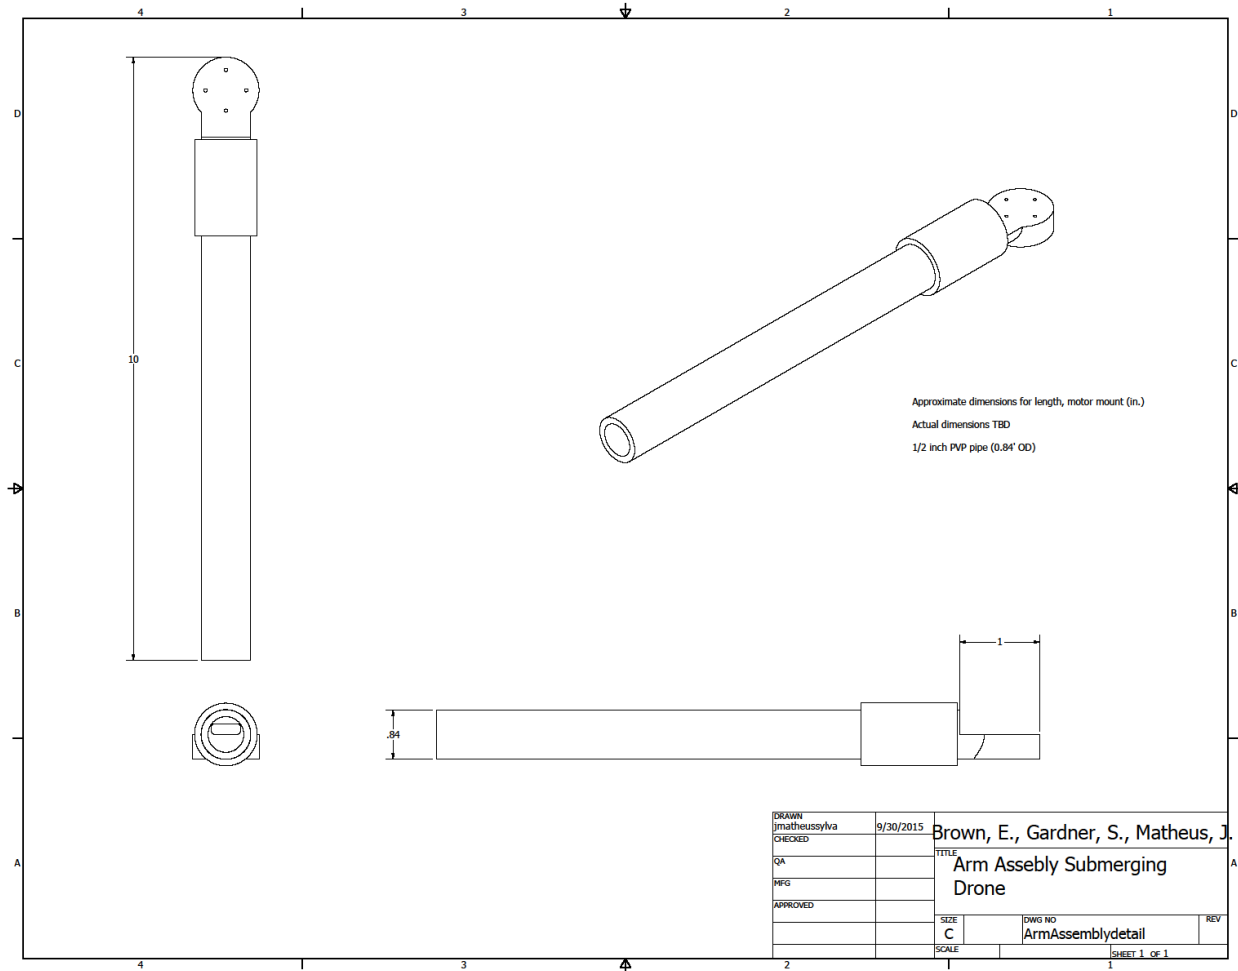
Detailed Drawing of the Proposed Motor Mount System
